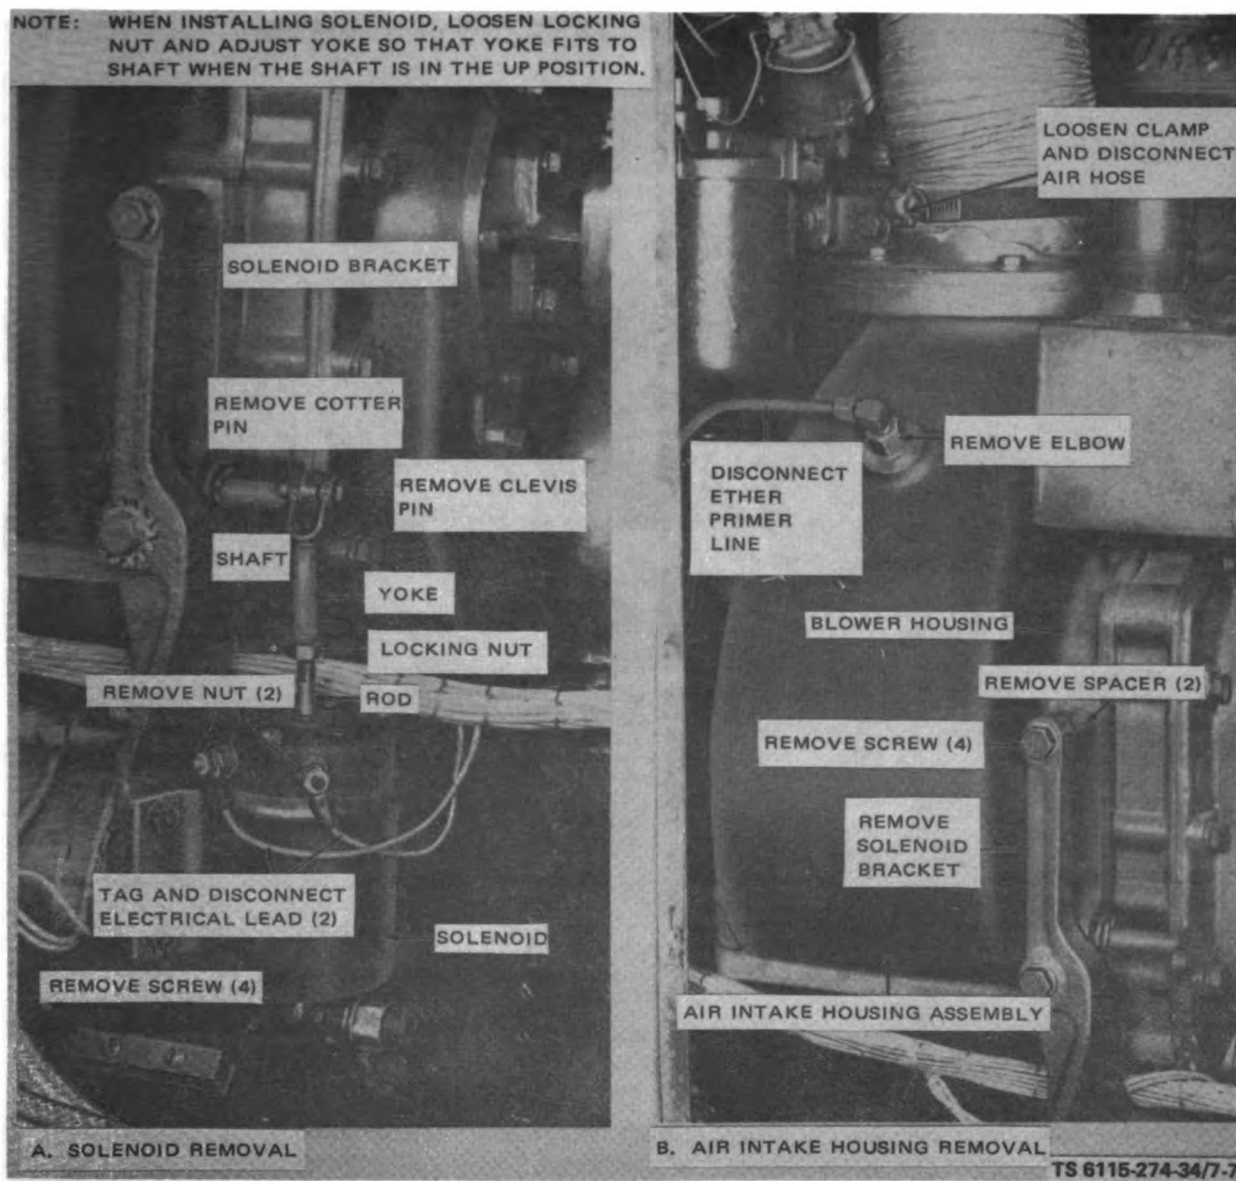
Air Intake Housing and Hydraulic Tank Removal and Installation
